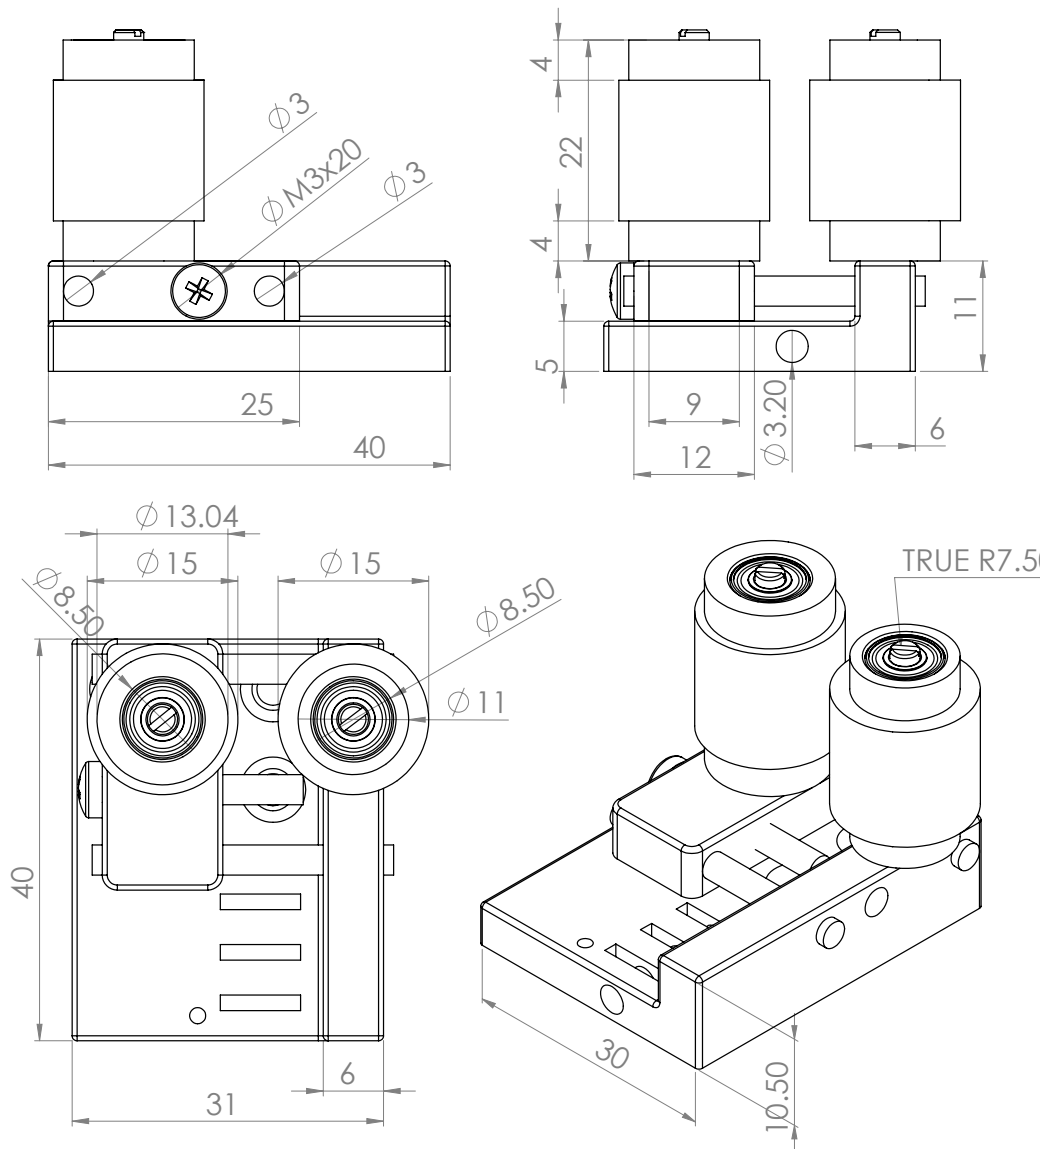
Technical drawing of the pinch-roller mechanism used for actuator tests (mm).
